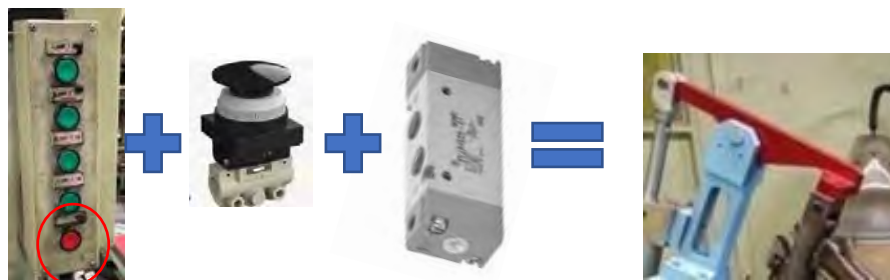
Switch and system that uses for welding jig after improvement
